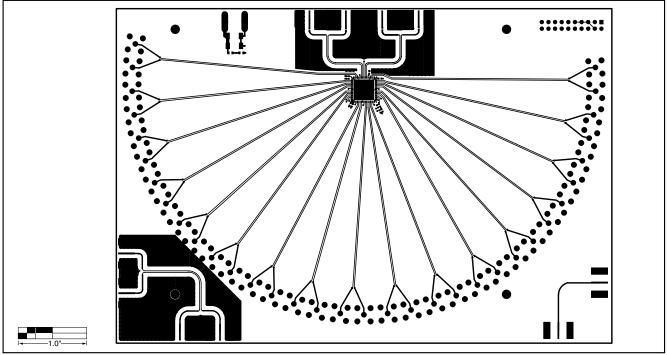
MAX3950 EV Kit PC Board Layout—Component Side
